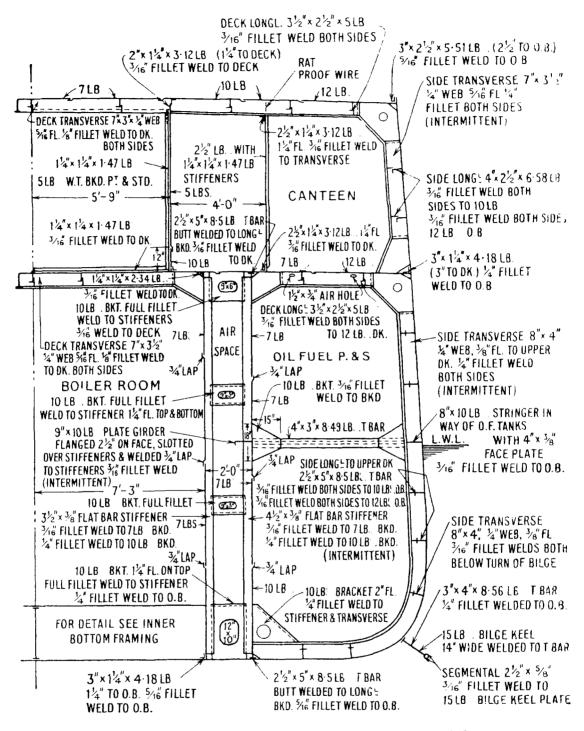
The welded longitudinally framed hull of HMS 'Seagull'. Section at frame 51, looking forward
